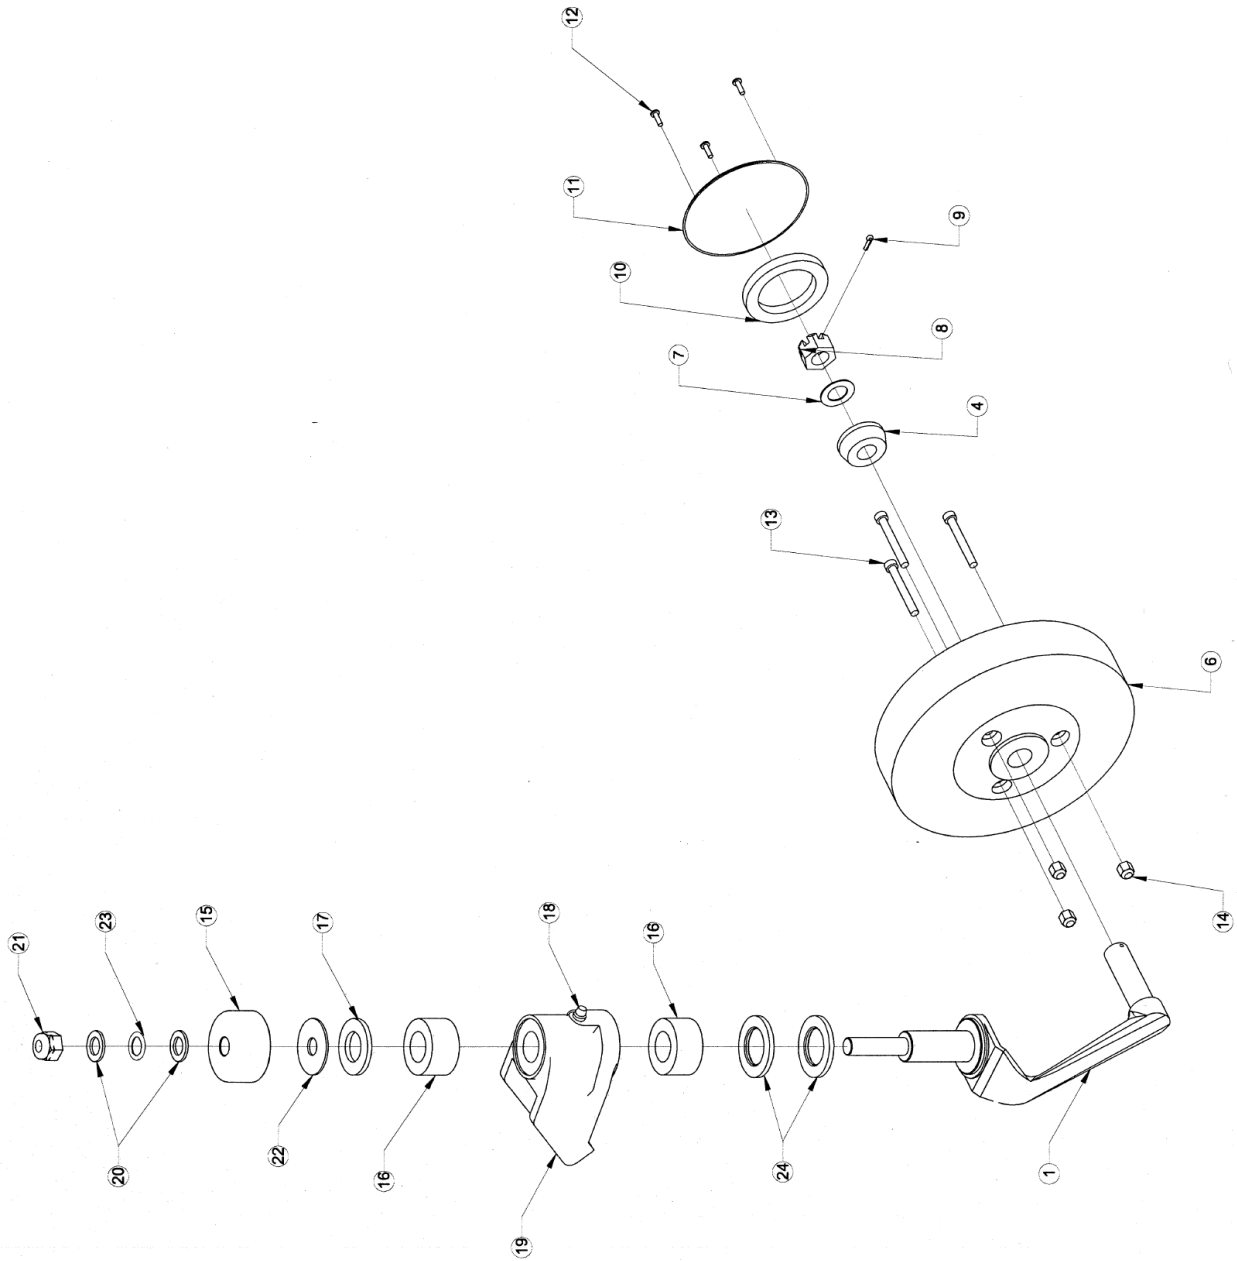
P/N L44000-3-24B (Alt. L44000-D501A) SWIVEL TAIL WHEEL EXPLODED VIEW
